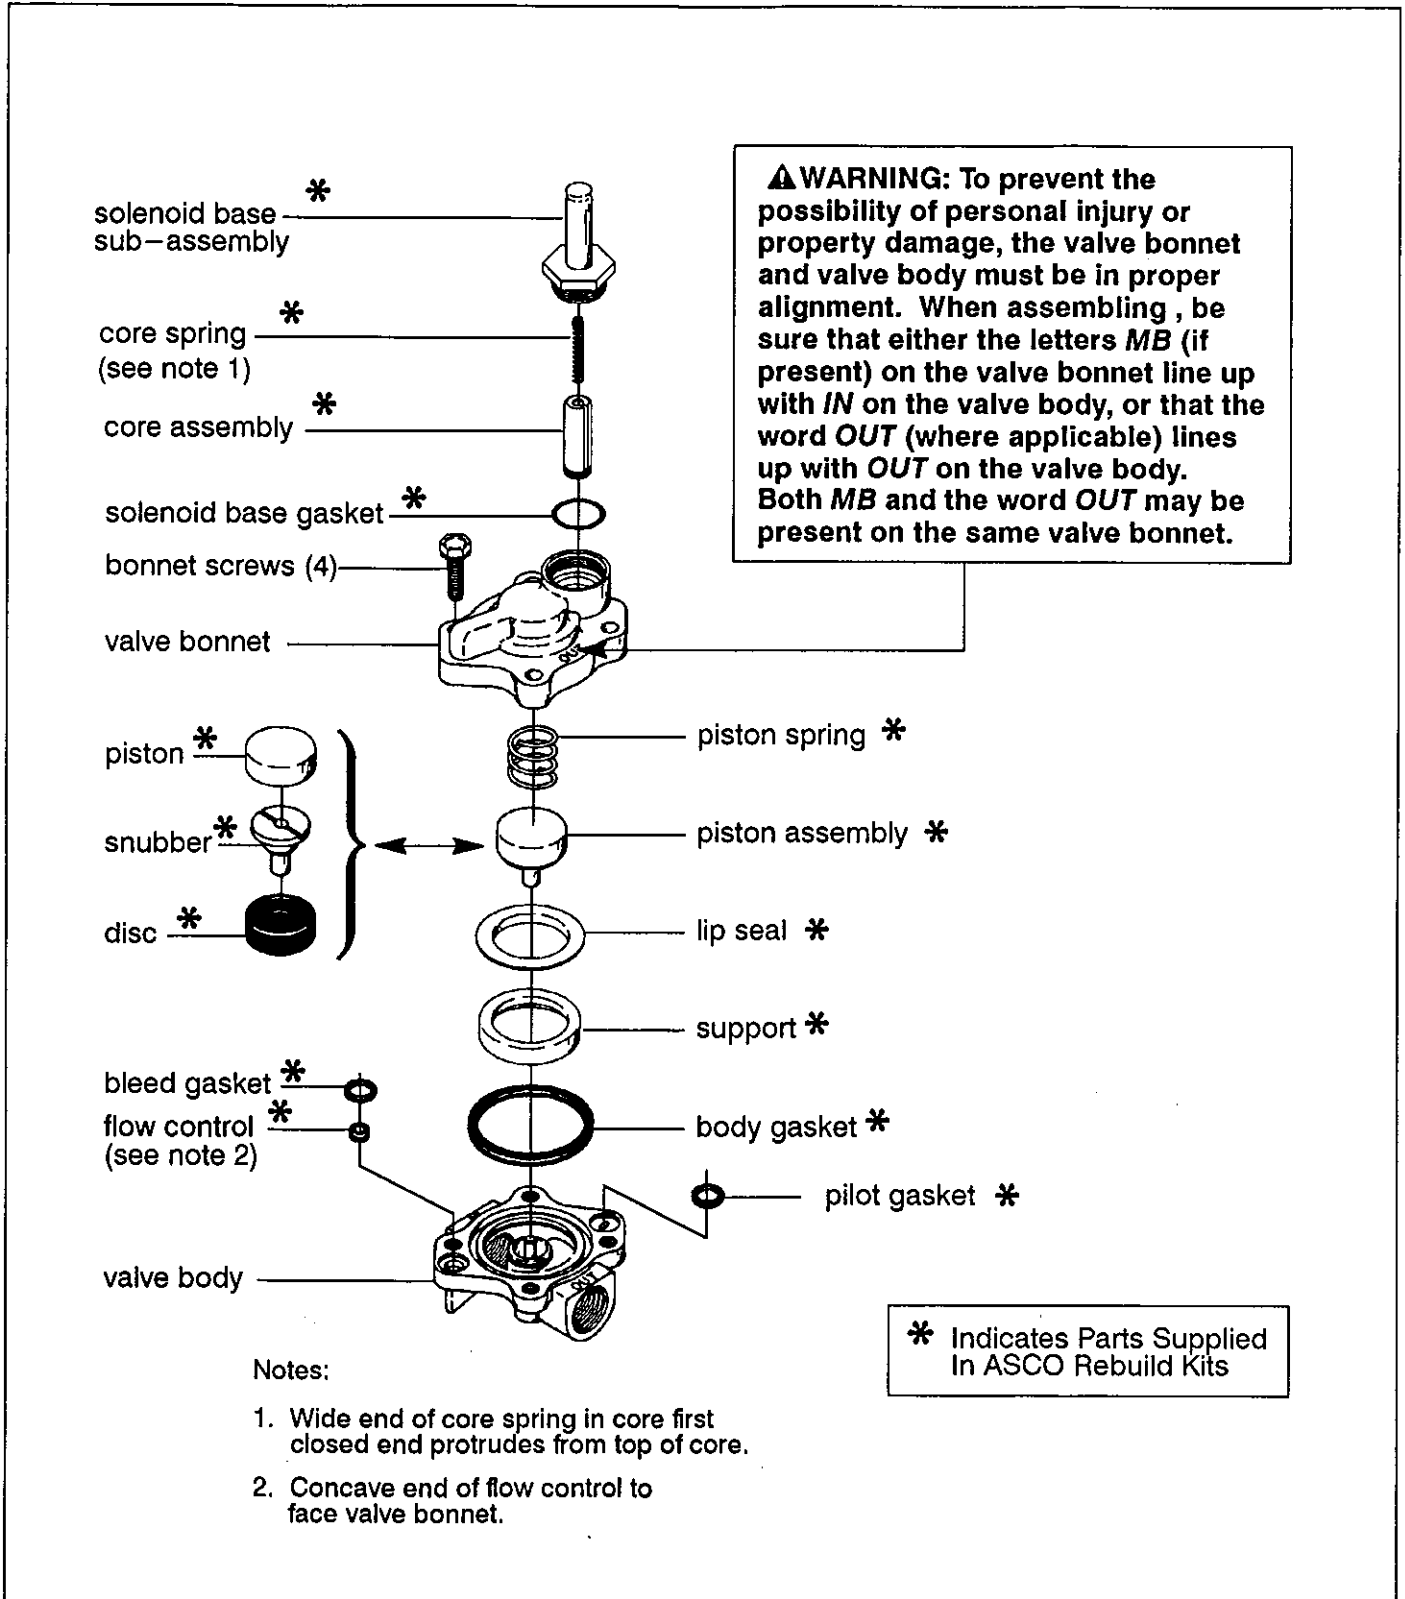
Series 8221 valve without solenoid, AC construction shown.
